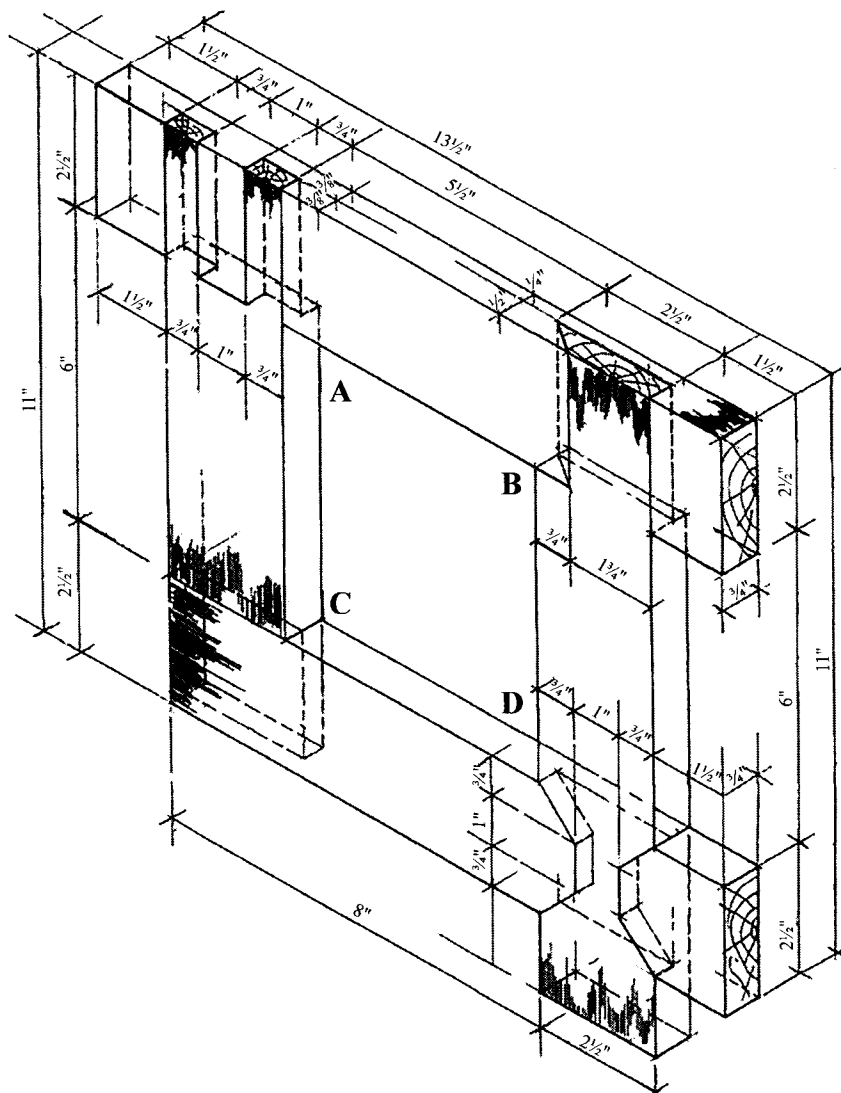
below shows a pictorial drawing representing an open frame jointed at each corner with the following woodworking joints.
